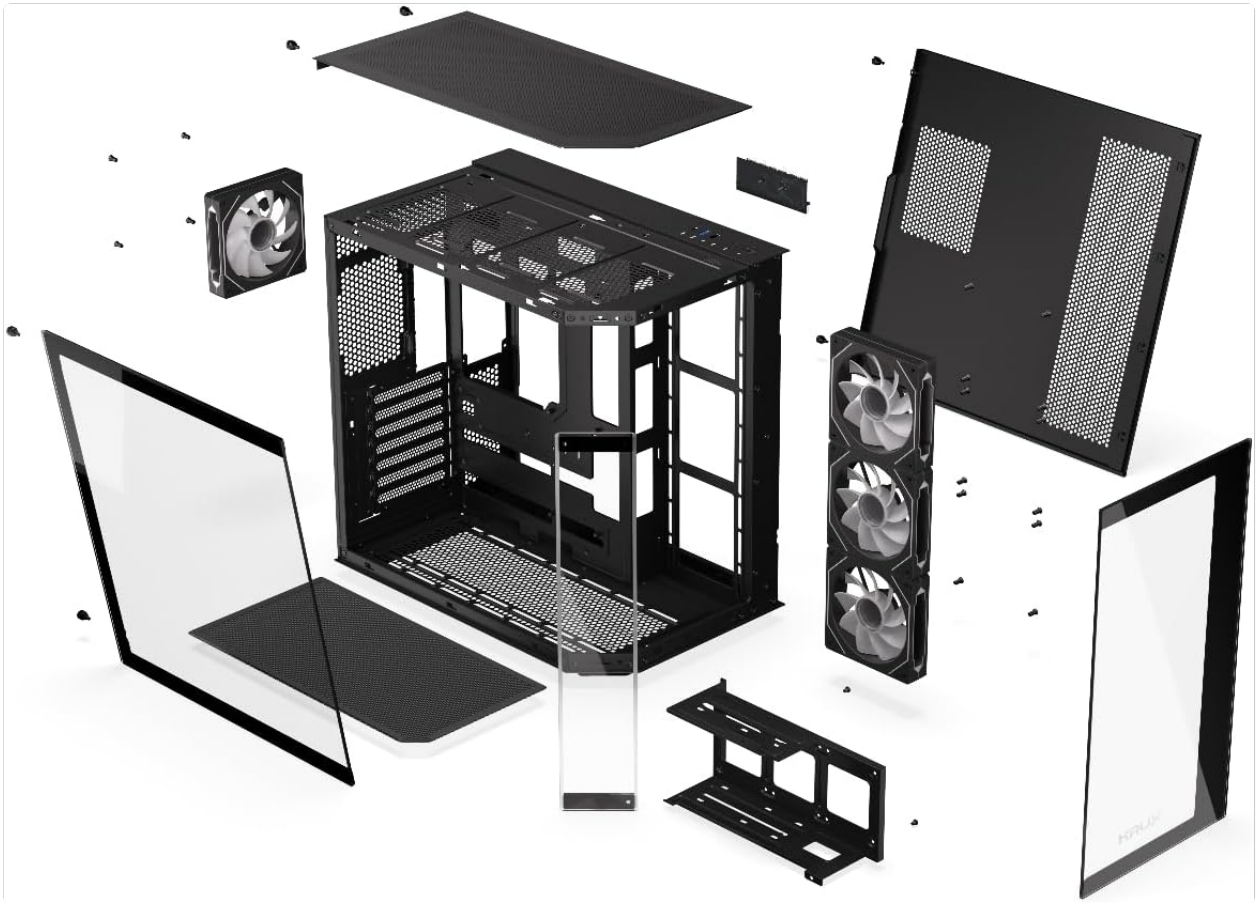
Exploded view illustrating the various components of the KRUX Empero PC case, including panels, frame, and fans.
